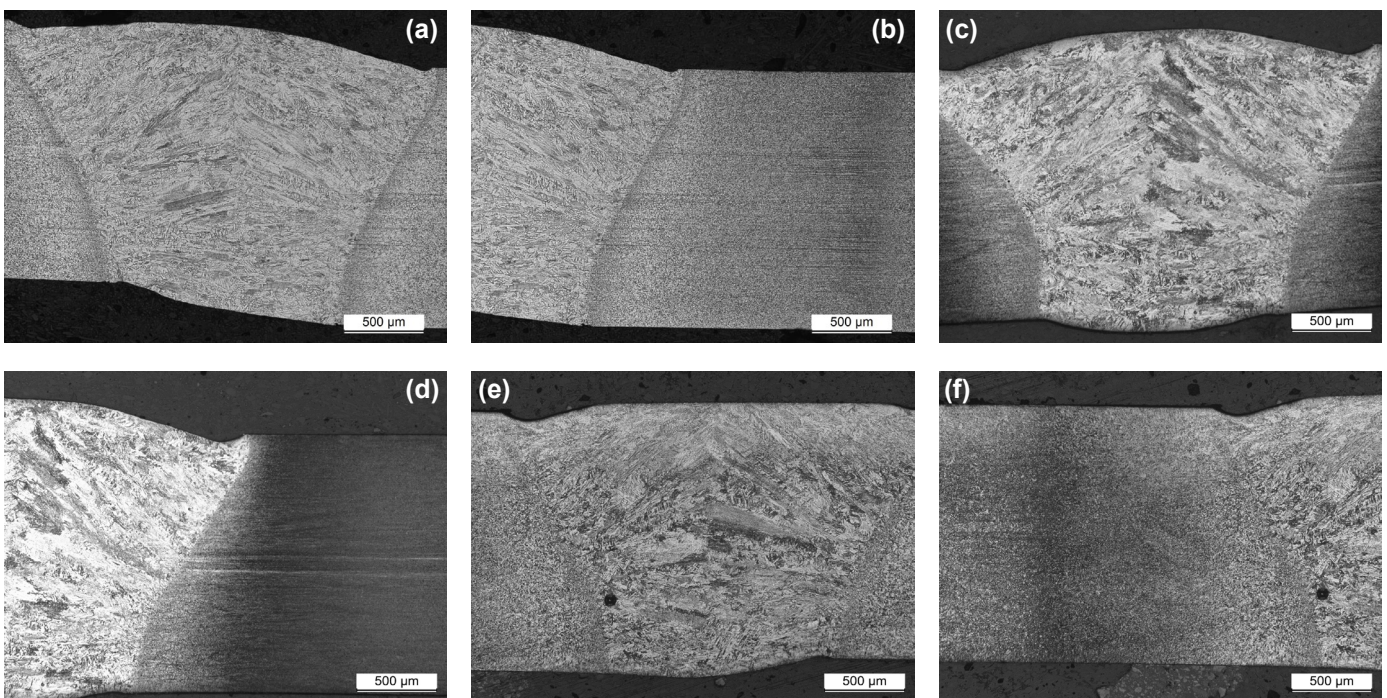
The welded joint microstructure: (a),(b) ES2 sample – welded in the solution condition; (c),(d) ES12 sample – welded in the 720°C/2 h + 620°C/4 h aged condition; (e),(f) ES22 sample – welded in the 550°C/4 h aged condition
